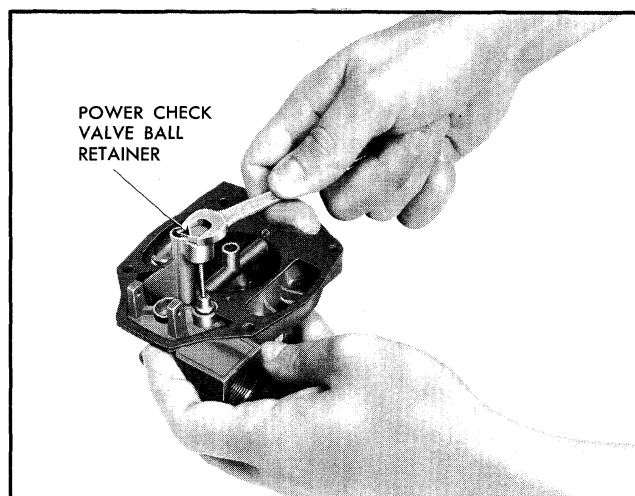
B-21 Removing Power Check Valve Ball Retainer
